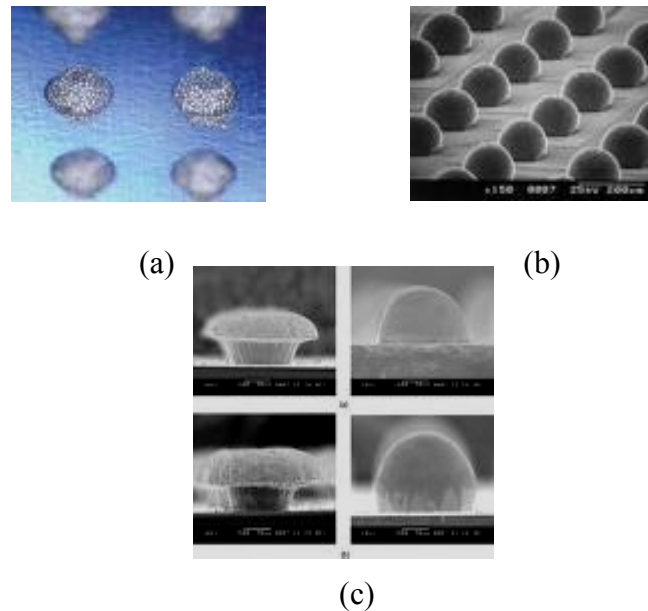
(a) Solder deposit by stencil printing before reflow (b) Solder deposit after reflow using stencil printing (c) Solder bumps before and after reflow by electroplating process.
